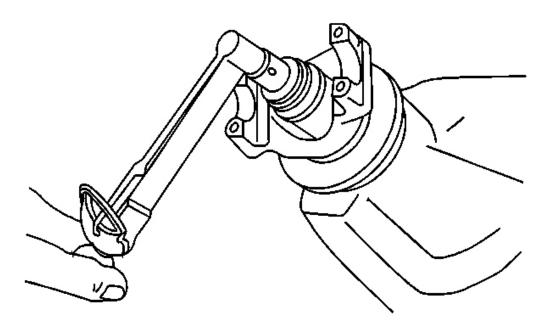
Measuring Pinion Rotating Torque Courtesy of GENERAL MOTORS CORP.
